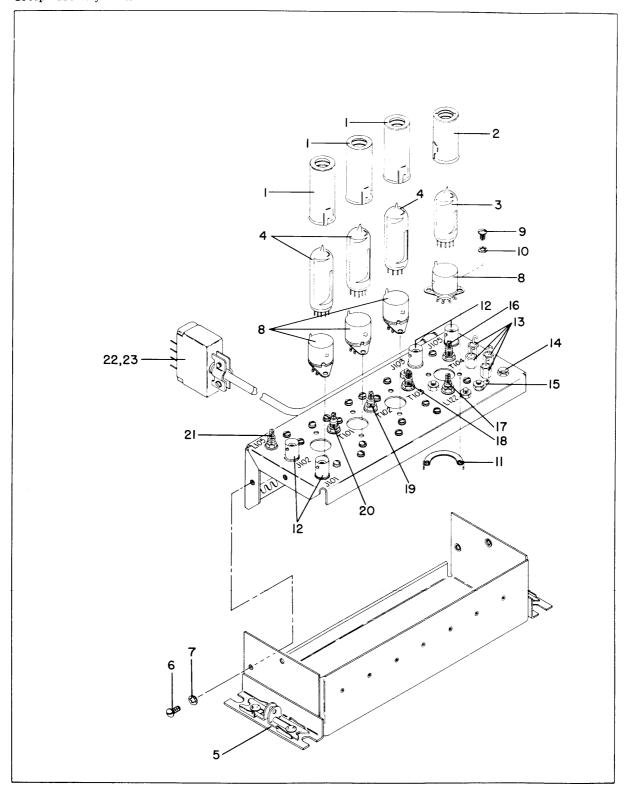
Wide Band Chassis and Cover Assembly, Top Exploded View (Sheet 1 of 2 Sheets), Index Nos. 1 through 23
